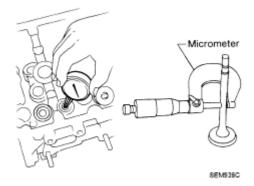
Measuring Diameter Of Valve Stem With Micrometer Courtesy of NISSAN MOTOR CO., U.S.A.
